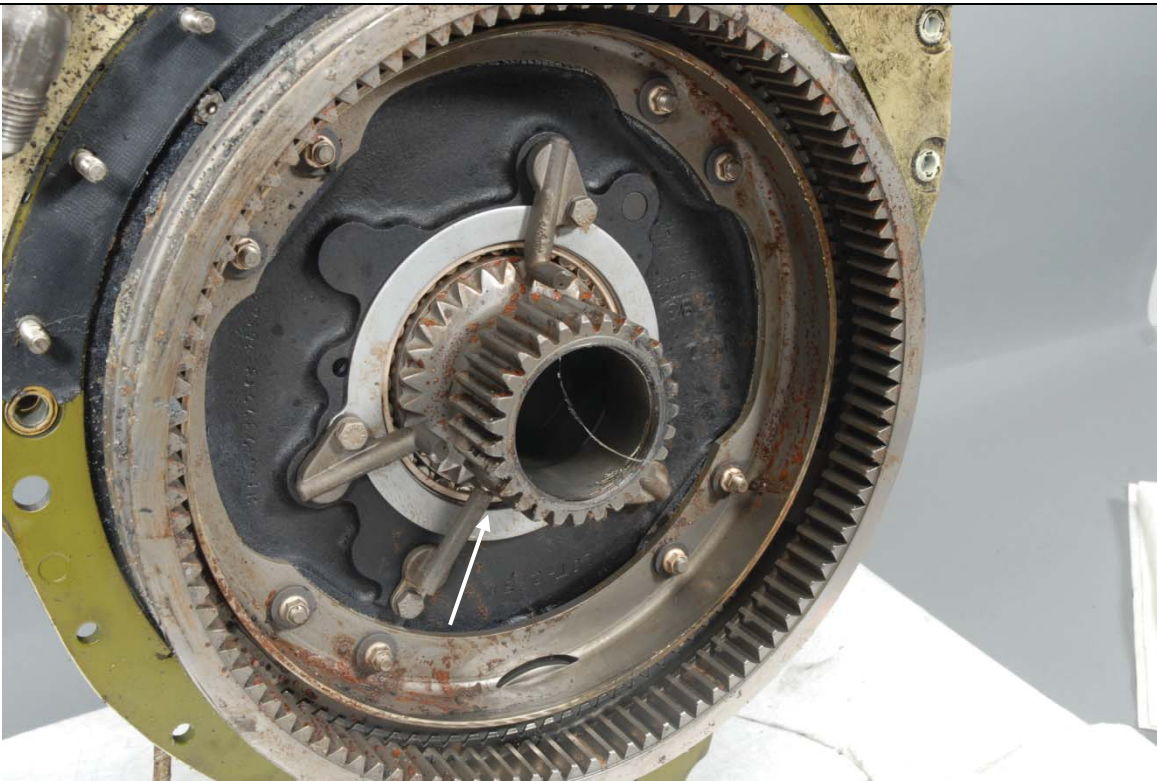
P-79297C, Aft Bull Gear Bearing and Liner, Displaced Aft
